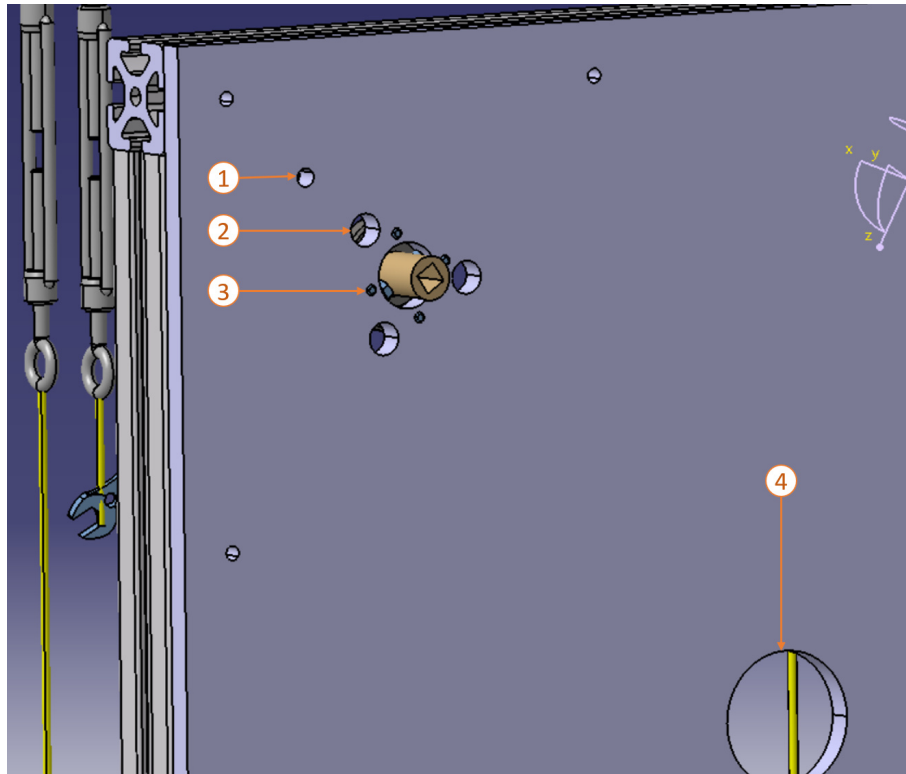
One quarter of the spacecraft simulator plate. With the MECSS/MMX spacecraft holes (1), cup-cone access holes (2), M4 holes for the attachment of the bearing (3), and the centered cutout for the push-off spring shell (4).
